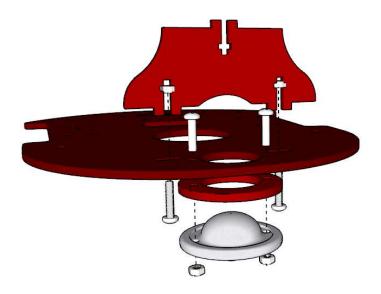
Bottom frame detail - Note the orientation of the caster and spacer (rolling ball faces down)
